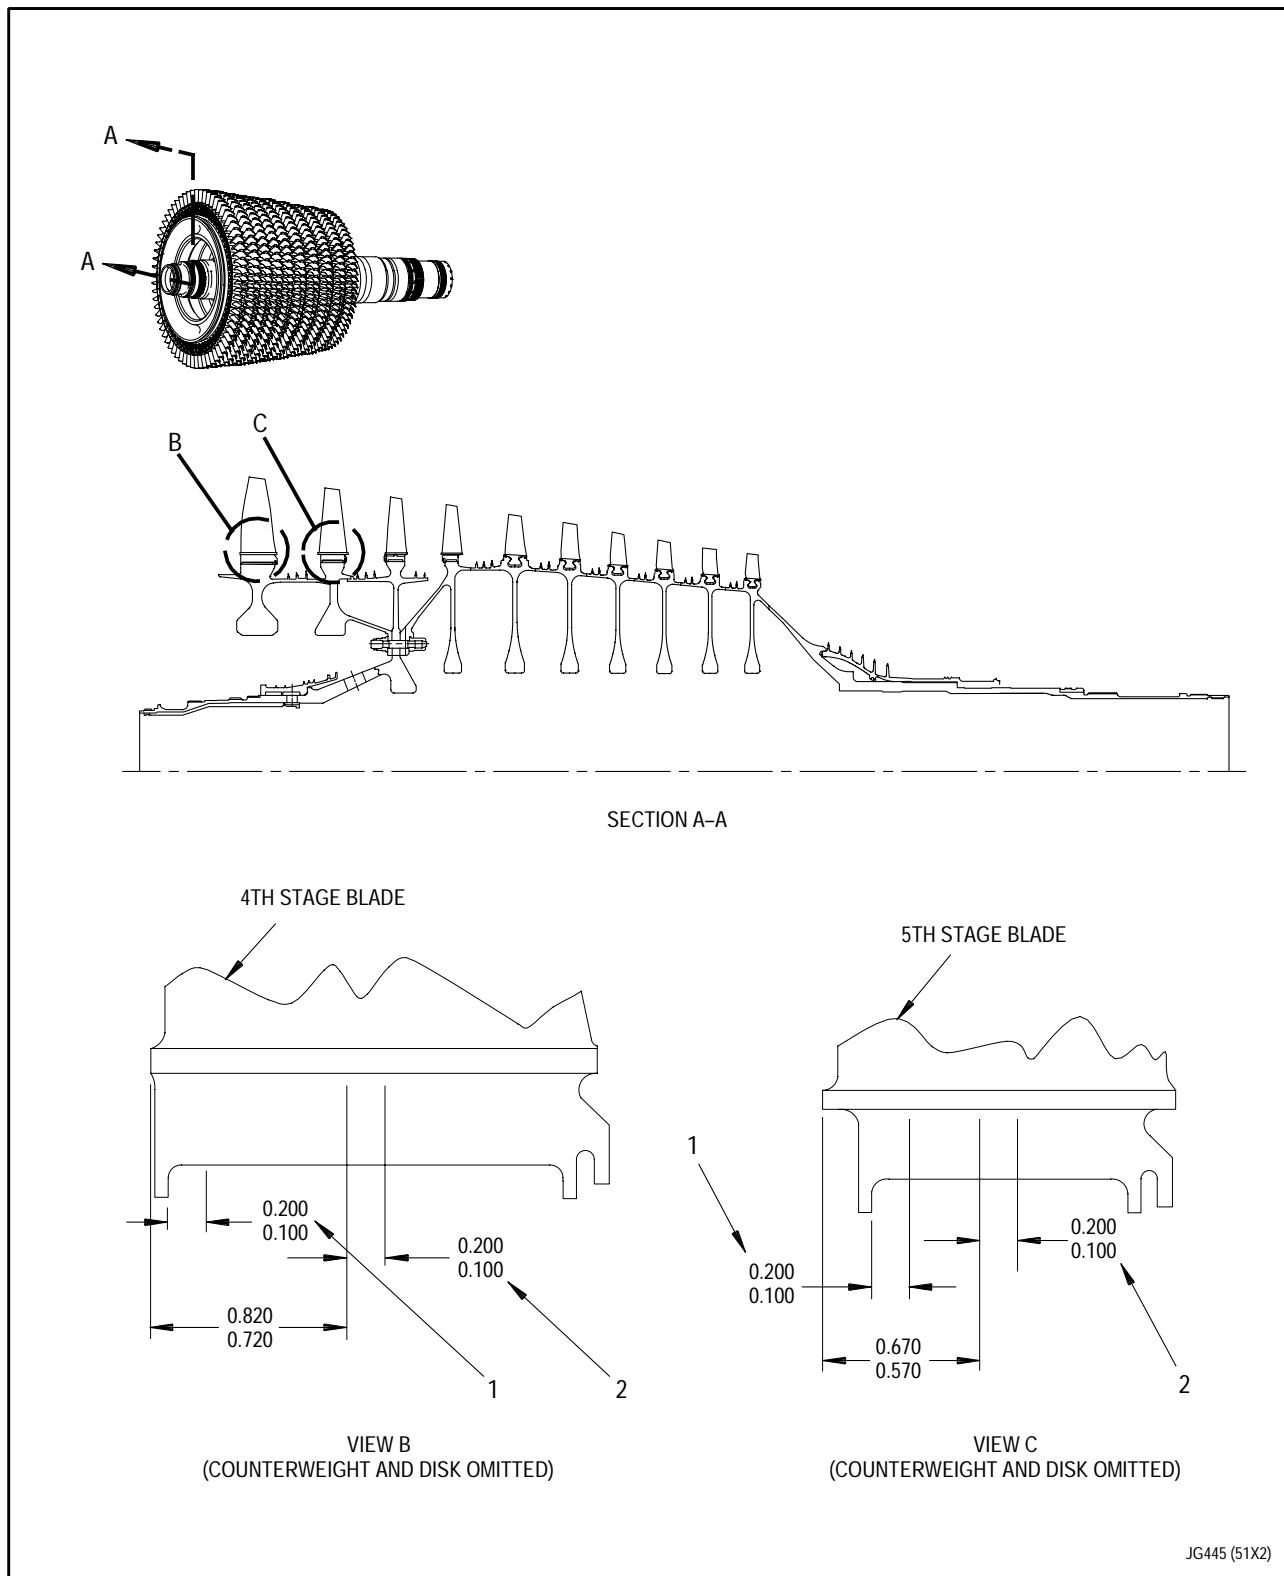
Fourth and Fifth Stage Blades - Application of PWA 36056 Adhesive Sealant (Sheet 1 of 2)
